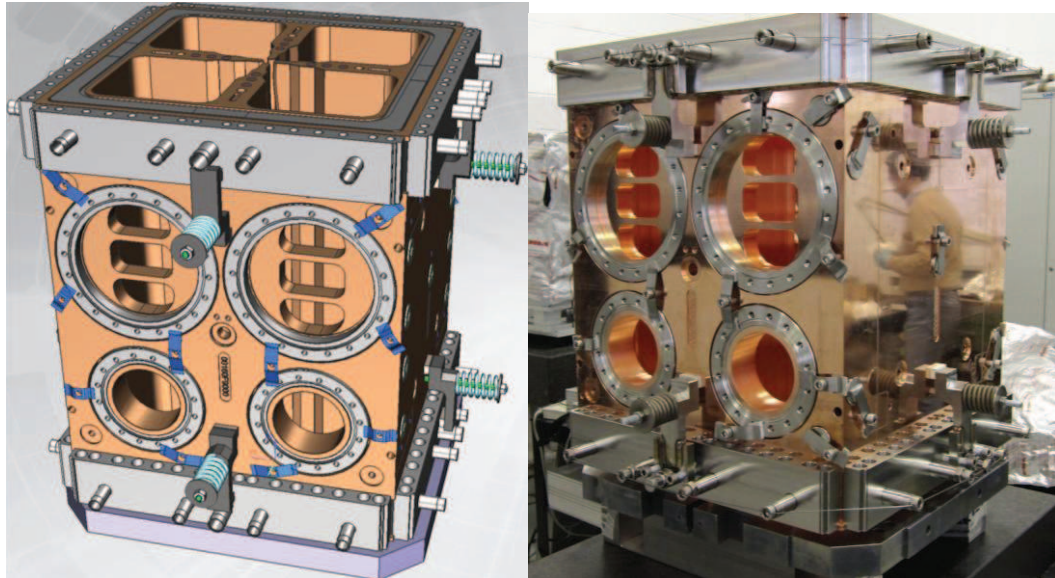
CAD view brazing assembly (left) and the module 16 before the second brazing (right)
